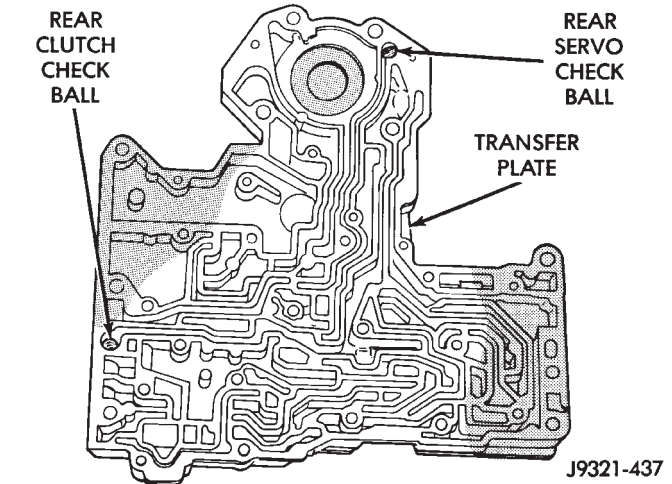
Rear Clutch And Rear Servo CheckBall Locations
